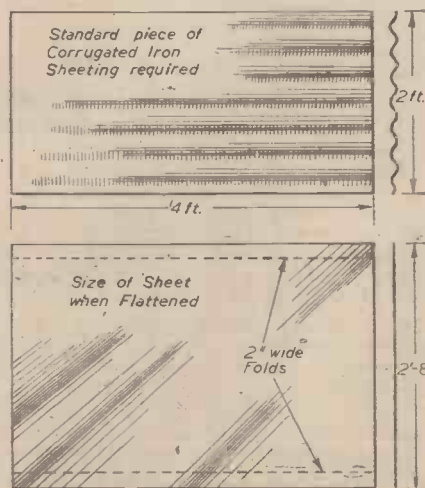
Sizes of the corrugated iron sheeting used for the hull.
